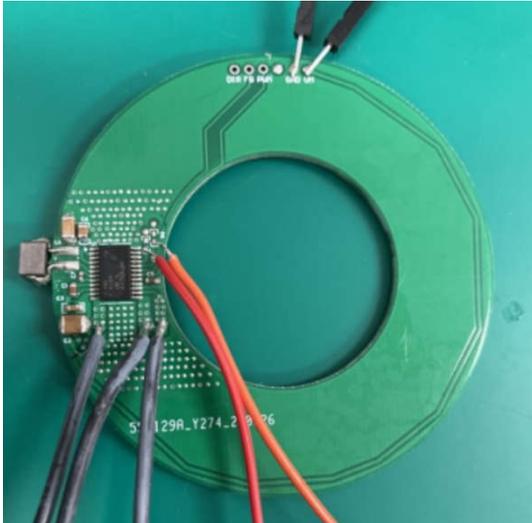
MCF8315 Two Layer With Inductance Version PCB
